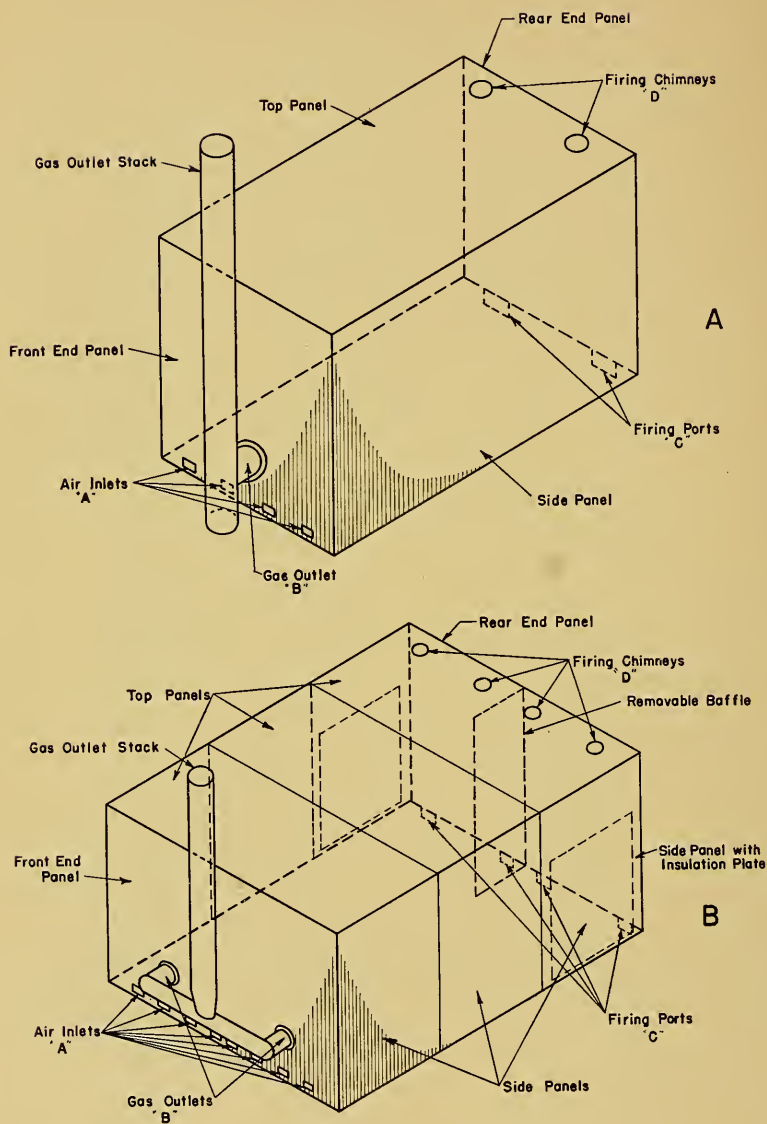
General View of the kilns showing relative position of the panels, firing ports, firing chimneys, gas outlets, air inlets, and gas outlet stack. A. One cord kiln. B. Four cord kiln.
